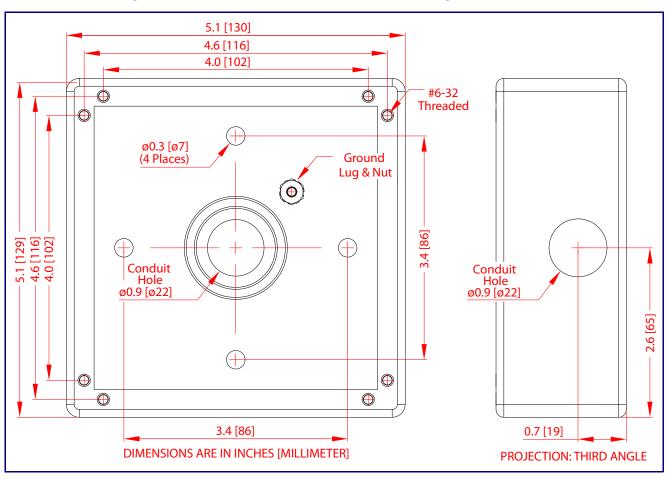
Unit Dimensions—Rear View with Mounting Hole Locations
